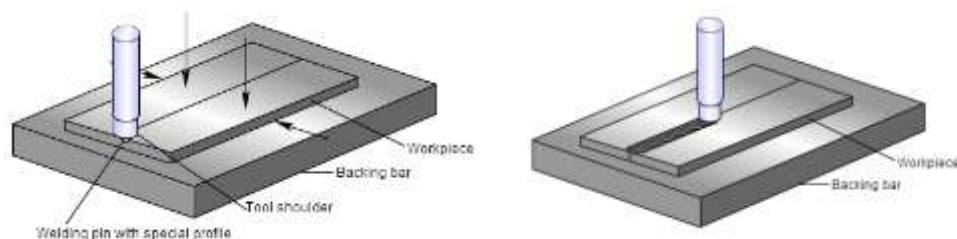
Friction Stir Welding (Höglund T. et Al., 2014)
